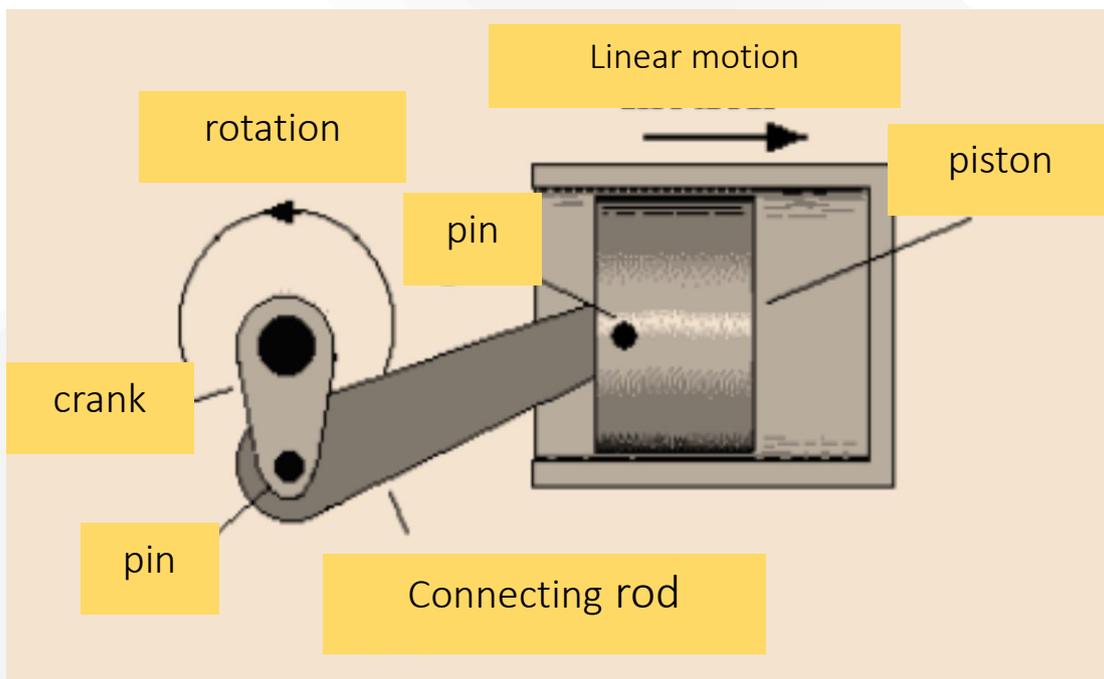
A Crank, Connecting Rod And Piston Mechanism [1]
